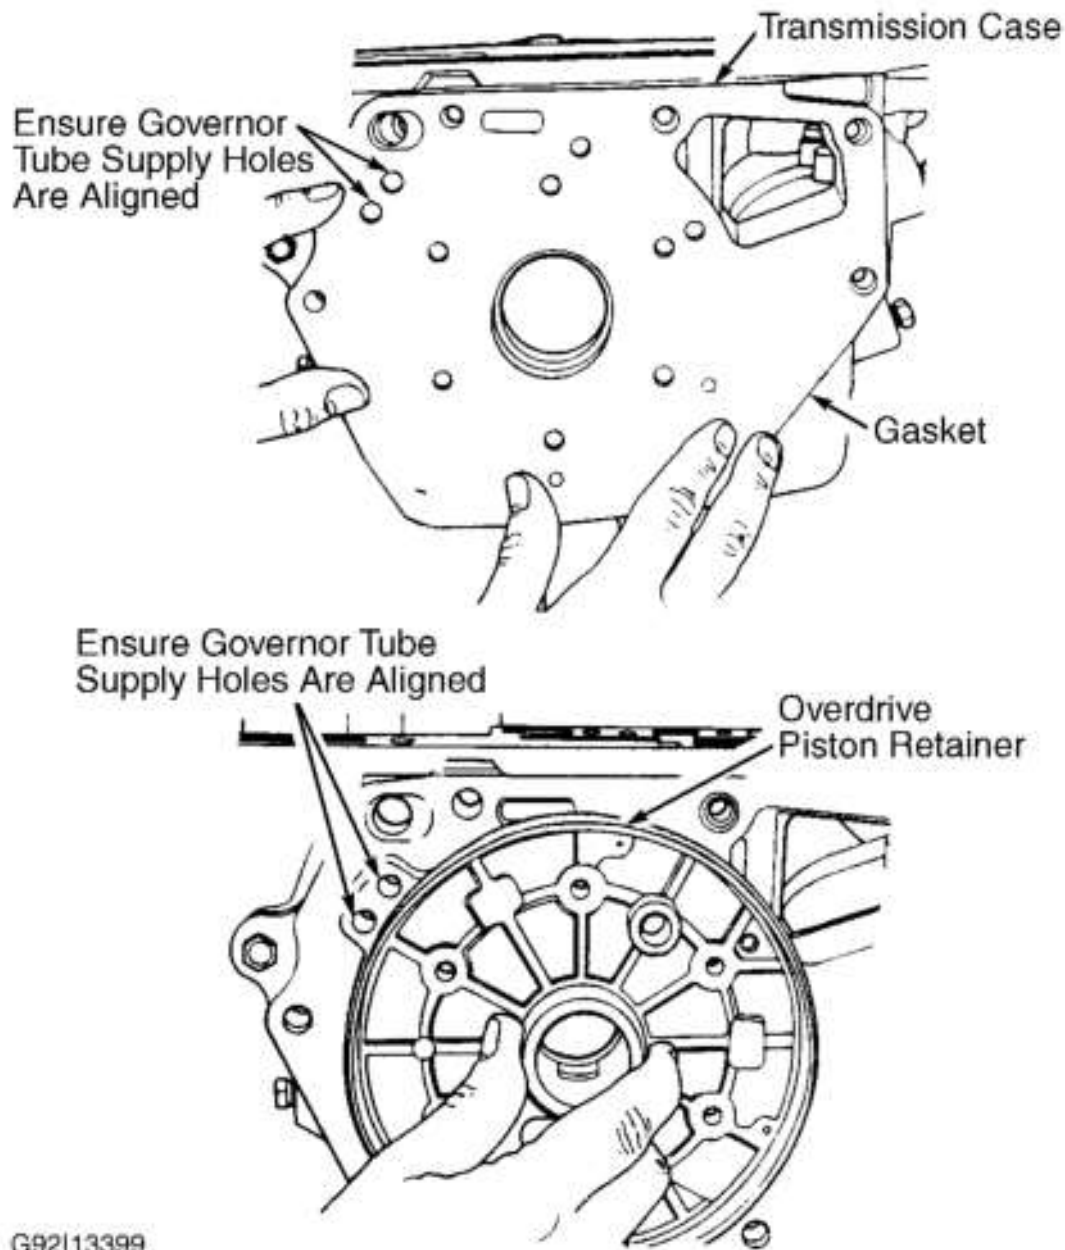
Installing Gasket & Overdrive Piston Retainer
